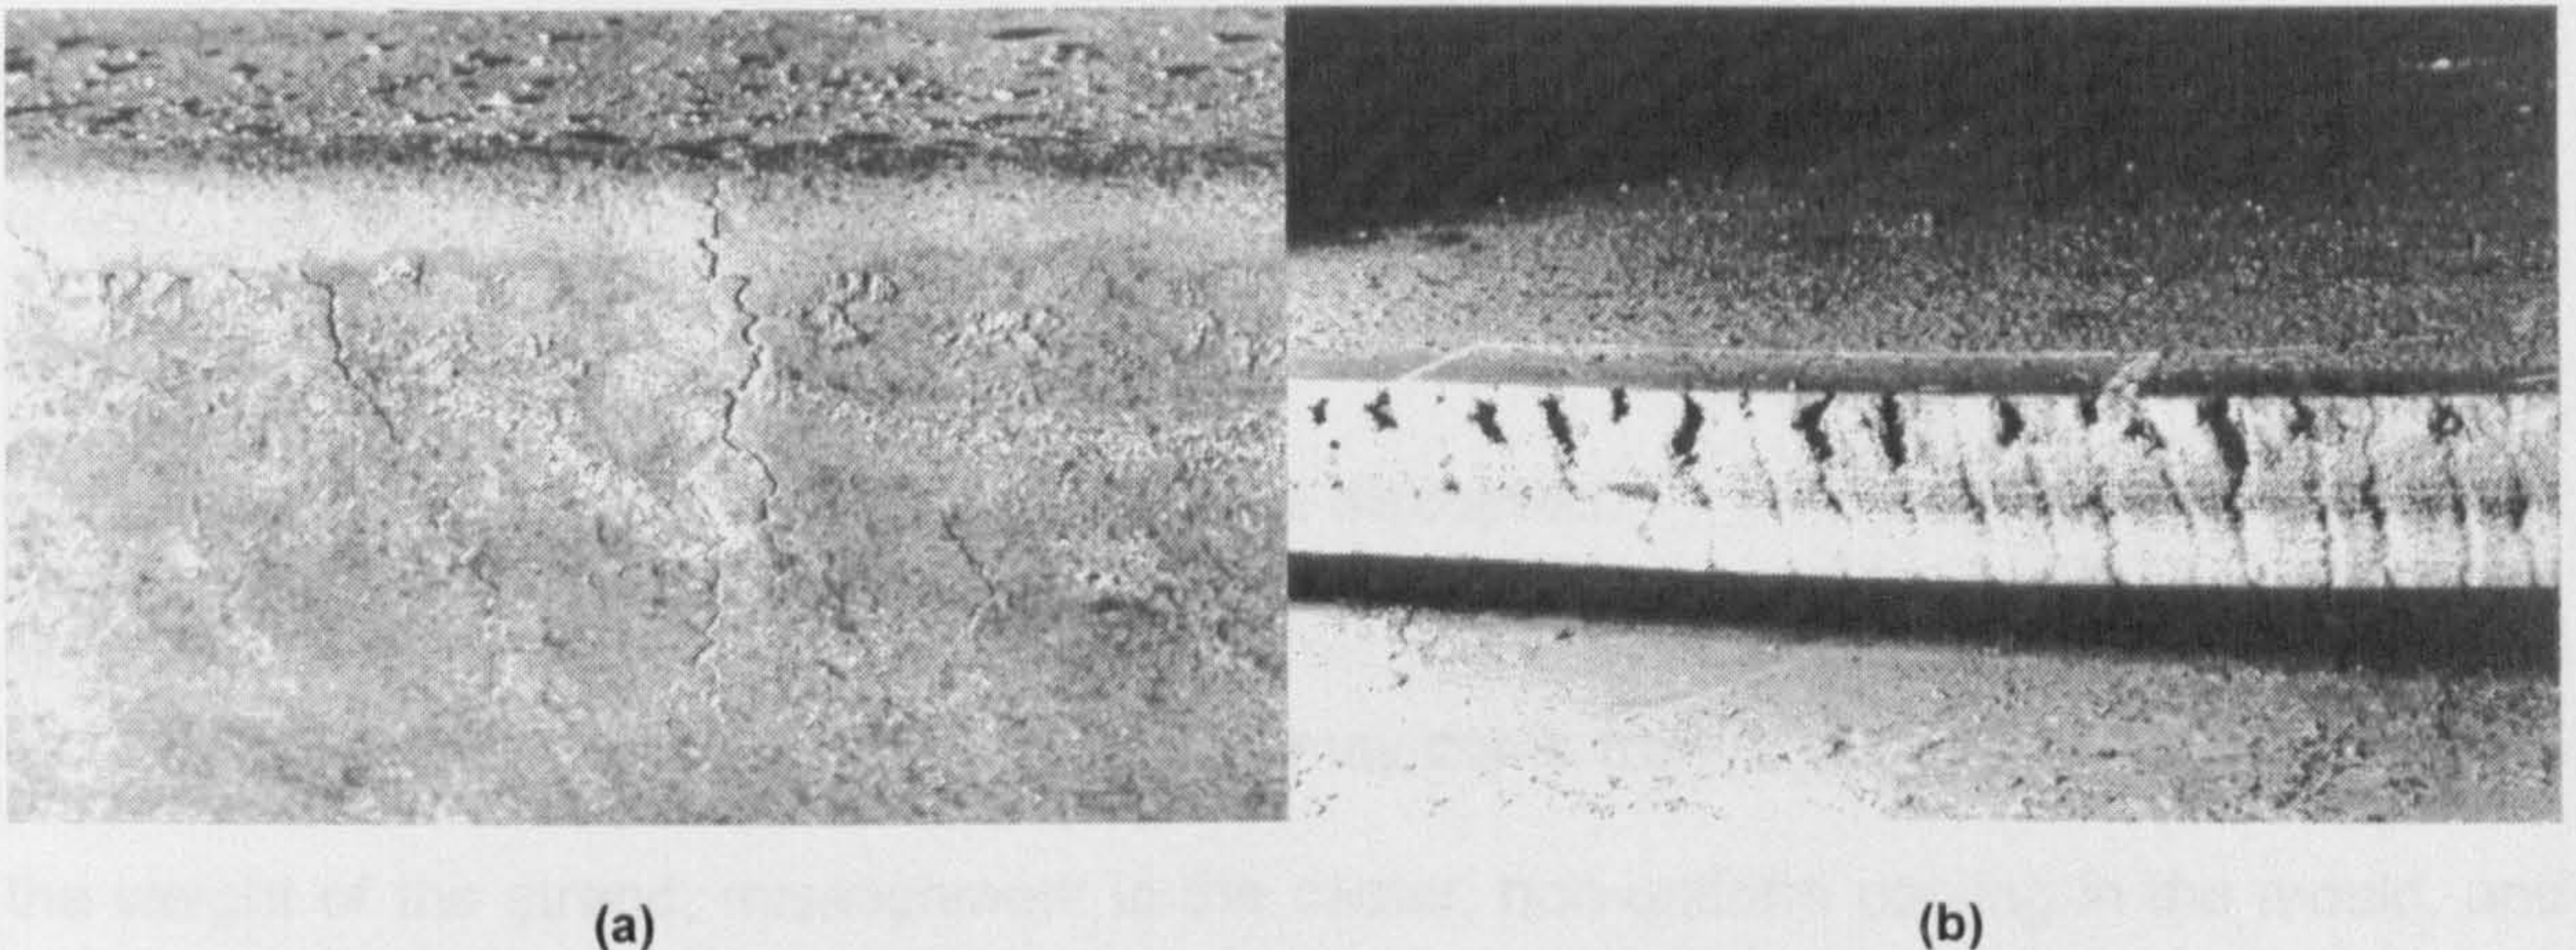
(a) Cold machine scarfed slab showing transverse cracking and (b) a partially rolled slab showing severe edge cracking.¹⁸
